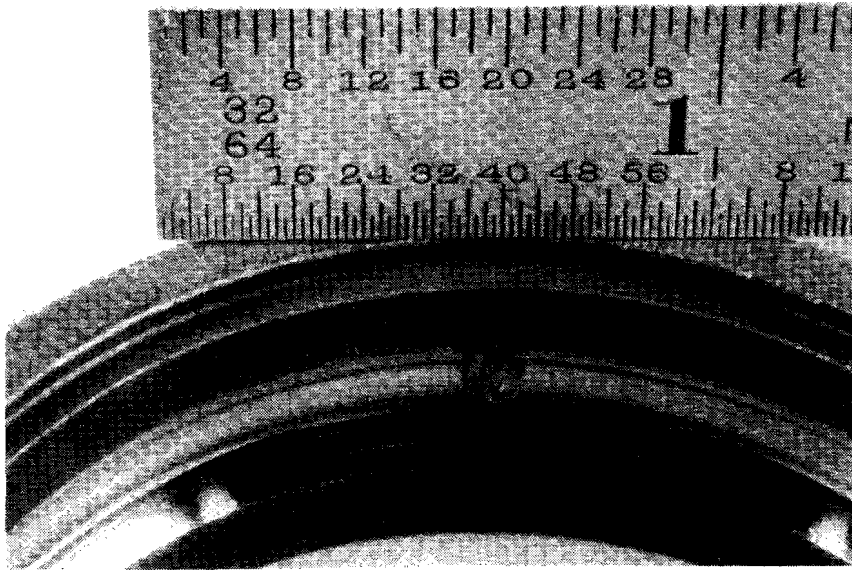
90-Degree Gearbox -143 Bearing Inner Race C/D,
